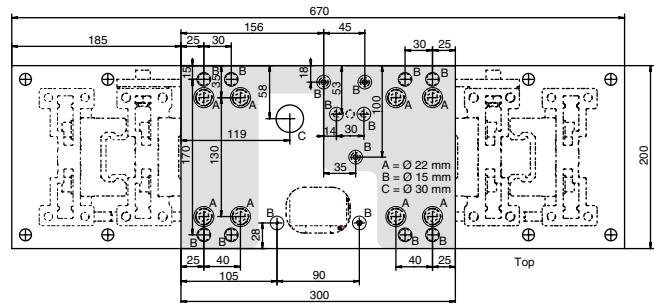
Dimensions of upper mounting plate (Dimensions in MM)
